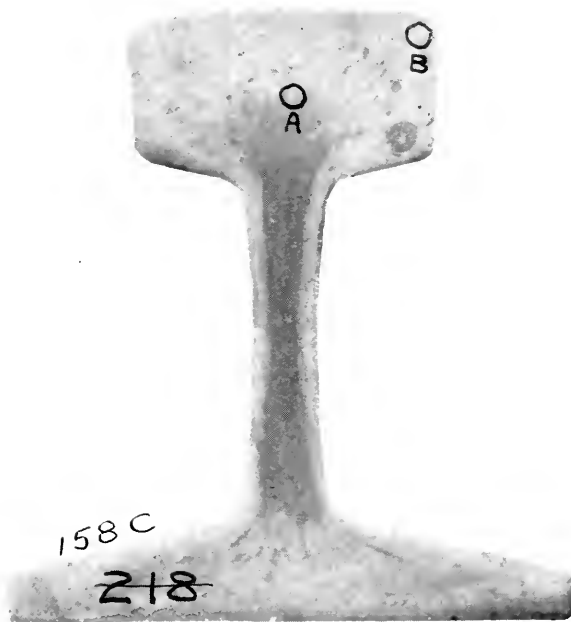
C. LIGHT ETCHING OF RAIL 158.
